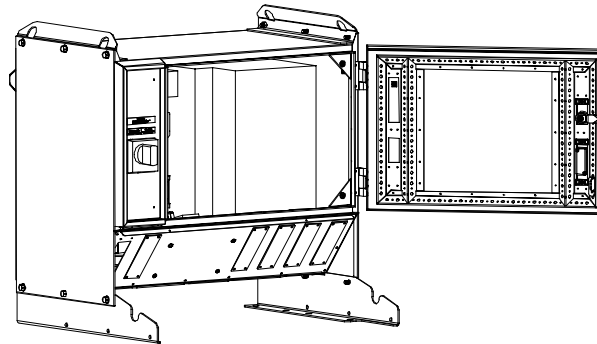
SpotWelding cabinet equipped with a weld timer from Bosch.
